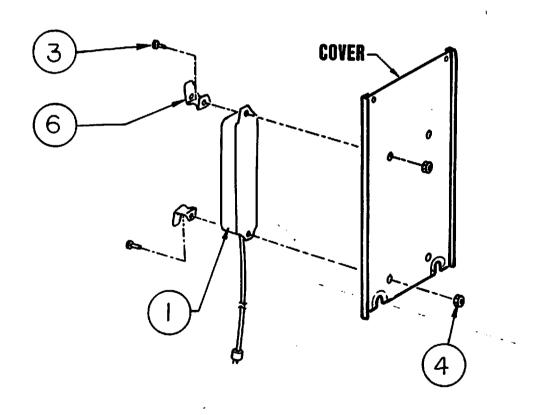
AC RECPTACLE BOX ASSEMBLY, PARTS LOCATION DIAGRAM
